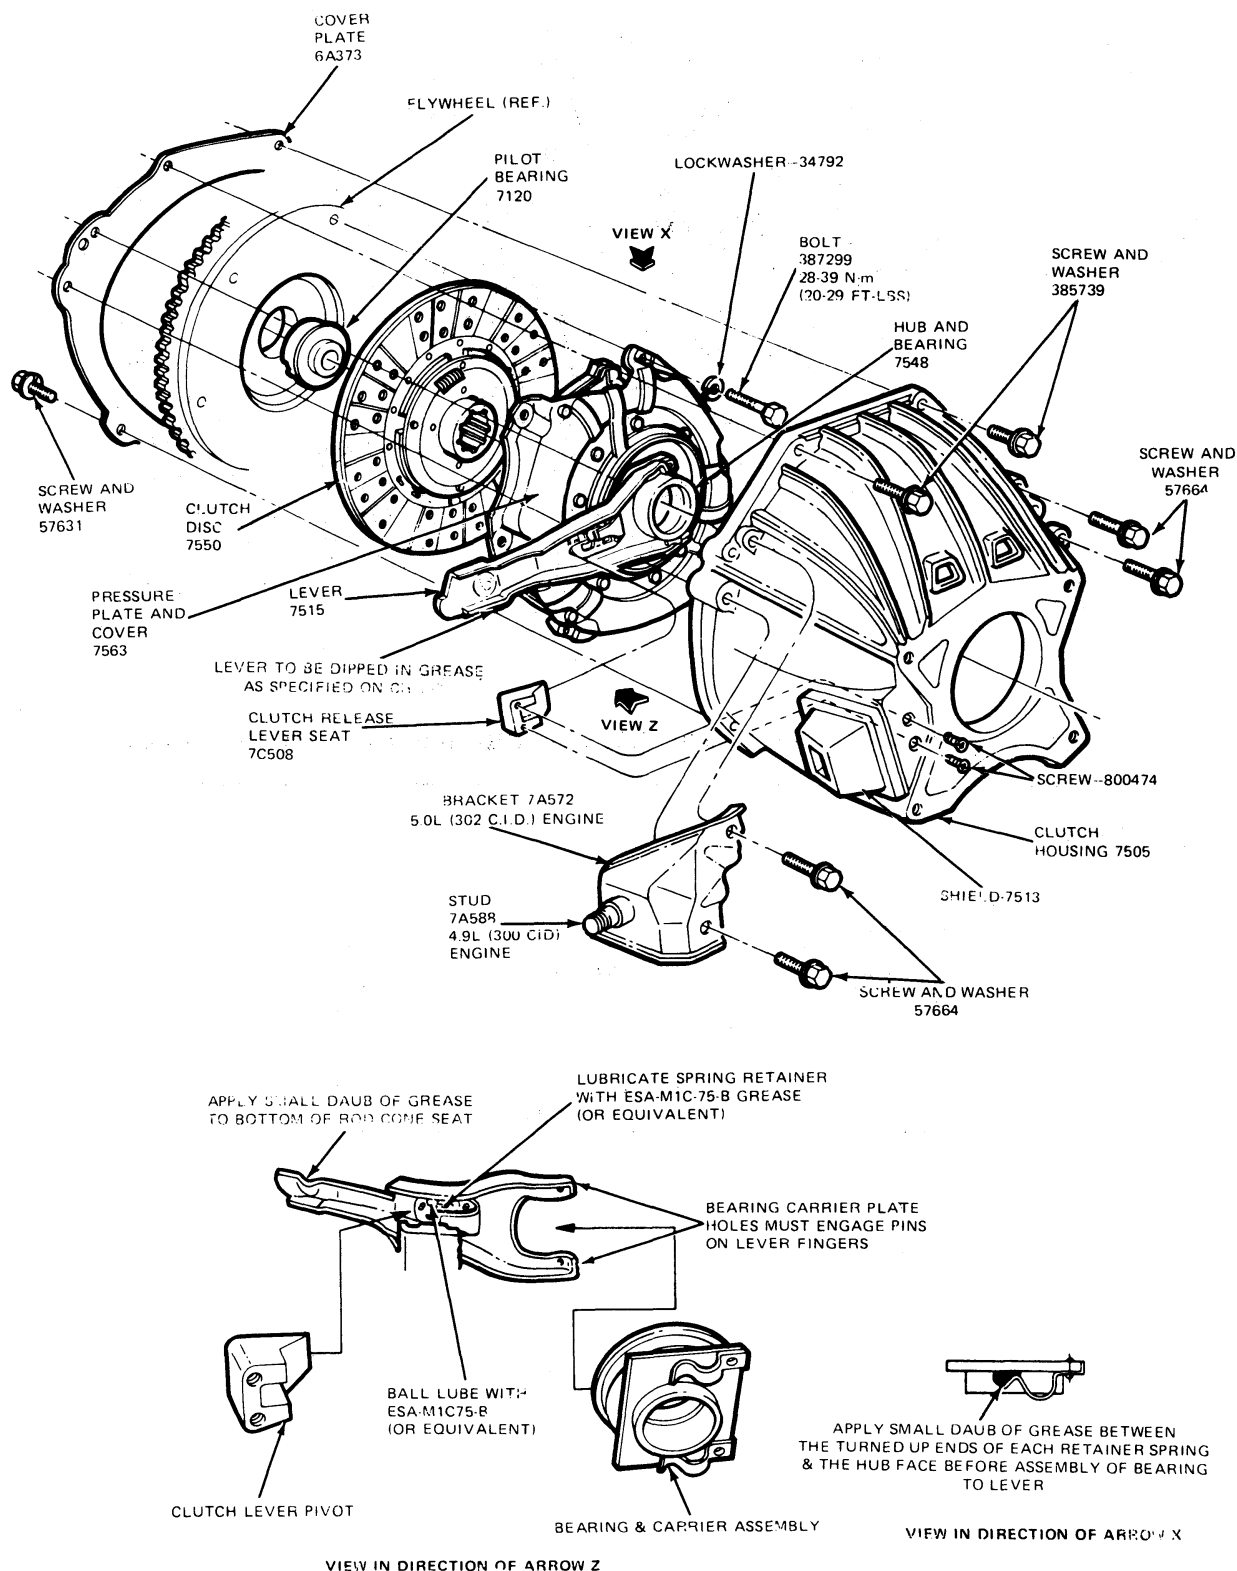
Clutch Installation—One-Piece Flywheel Housing—E-100—E-350
